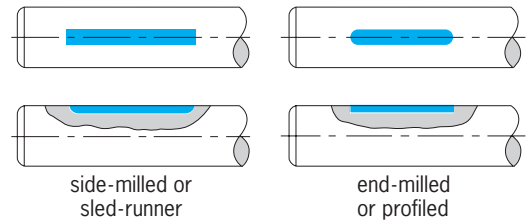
Types of keyways. (After P. H. Black and O. E. Adams, Jr., *Machine Design*, 3d ed., McGraw-Hill, 1968)
